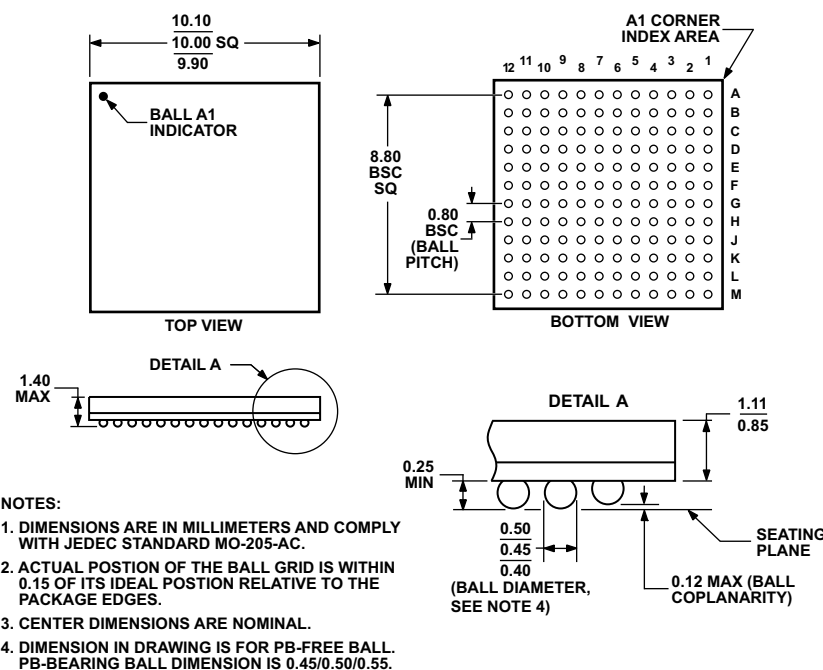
144-Ball BGA [CSP_BGA] (BC-144-6)
